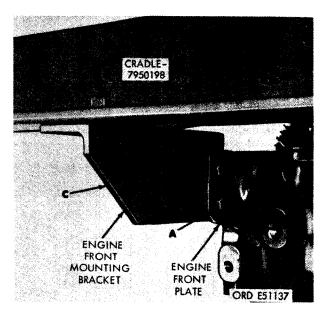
REMOVING OR INSTALLING ENGINE FRONT MOUNTING BRACKETS.
